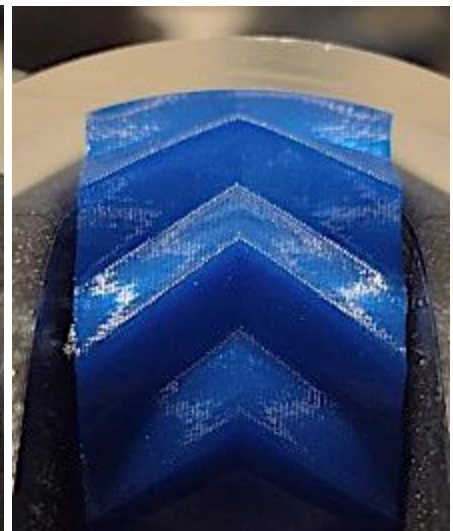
(right): Gear with a belt installed, both conforming to the bore contour.
